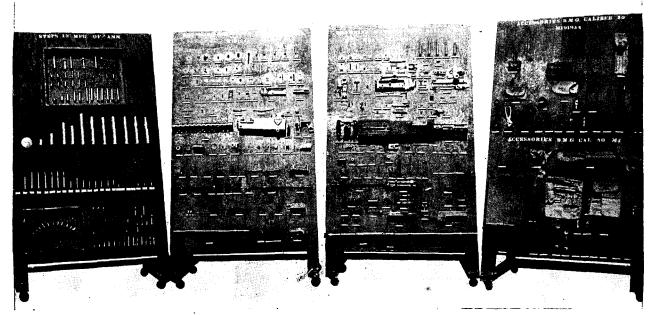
Ammunition and gun disassembly display panels of the Browning machine gun.
